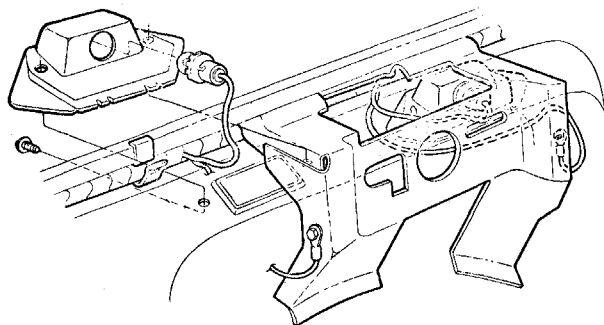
Exterior Lamp Installation - Chevrolet Styles
